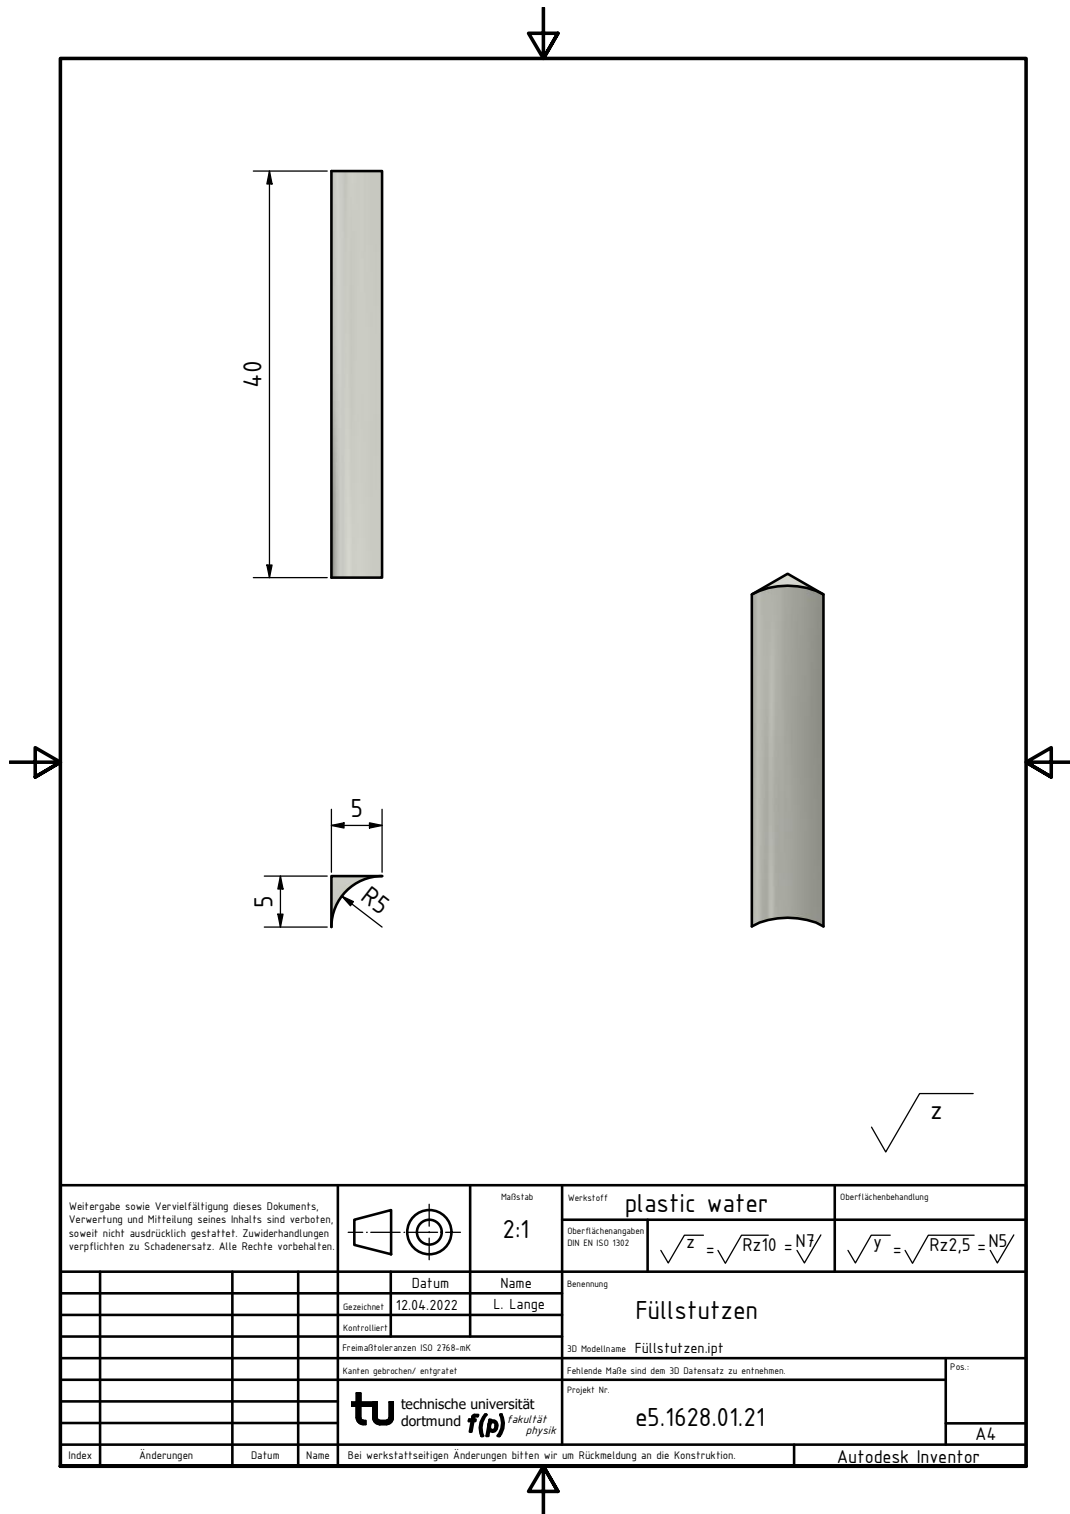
Construction Drawing: general filling pieces for the brackets.
